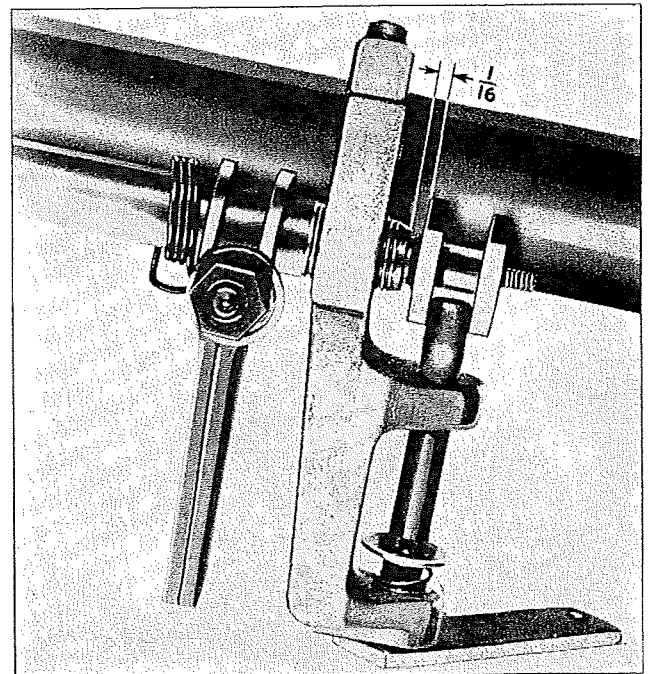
Chevrolet 1939. Selector Lever Guide Adjustment
